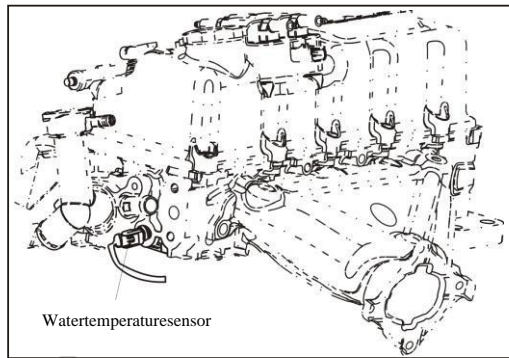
Removal of Tritec 1.6L Engine Water Engine Temperature Sensor
